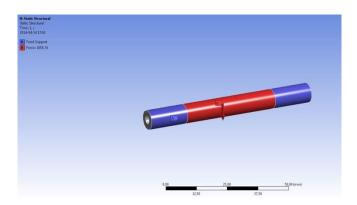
Bracket joint shaft Ø 8mm setup in ANSYS
